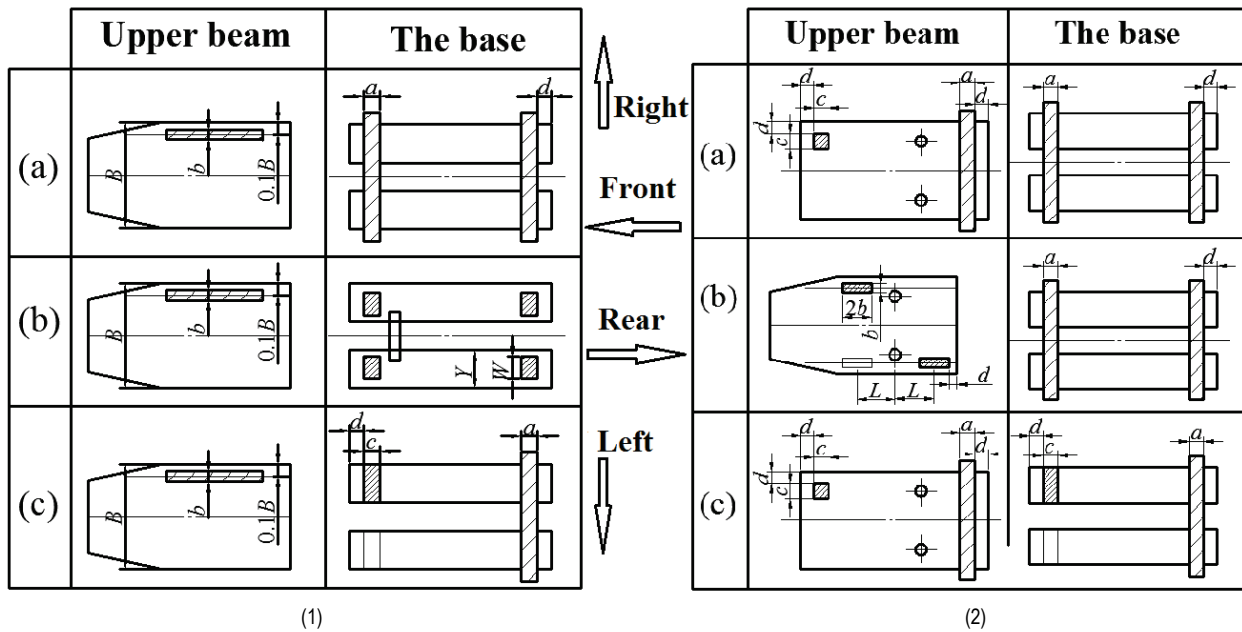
Position and size of heel block. (1) Upper beam bearing the eccentric load; (2) Other test conditions
